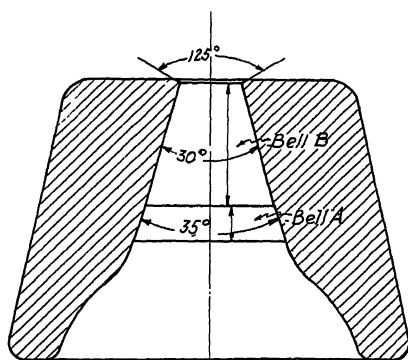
DIE WITH 30° BELL AND NO BEARING, WHICH WILL ALWAYS PRODUCE CHECK MARKS.
